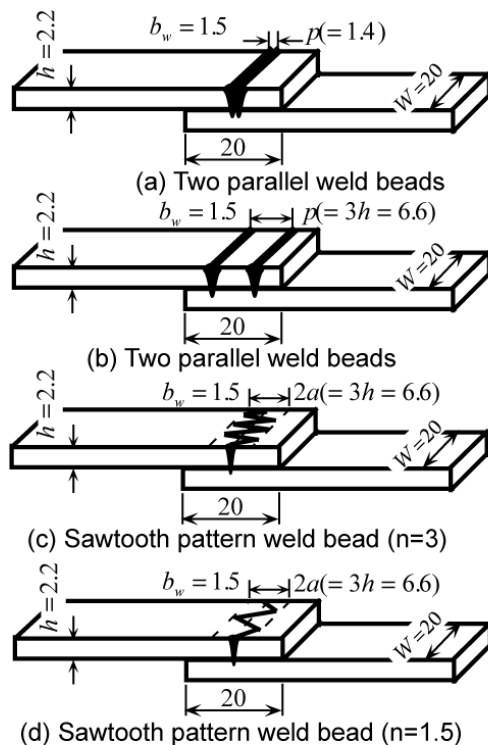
Various weld bead pattern of lap joint specimens
